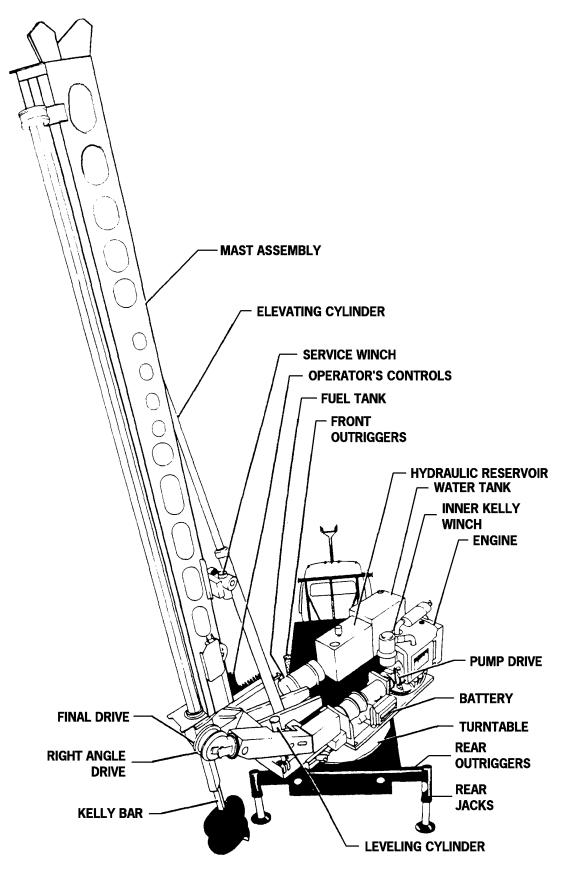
General Locator - 700/800 Truck Mounted Machine
